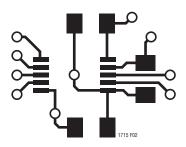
Typical Topside Metal for Multilayer PCB Layouts
